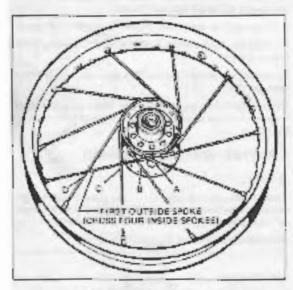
Spoking Wheel - 18 Inch Wheel
